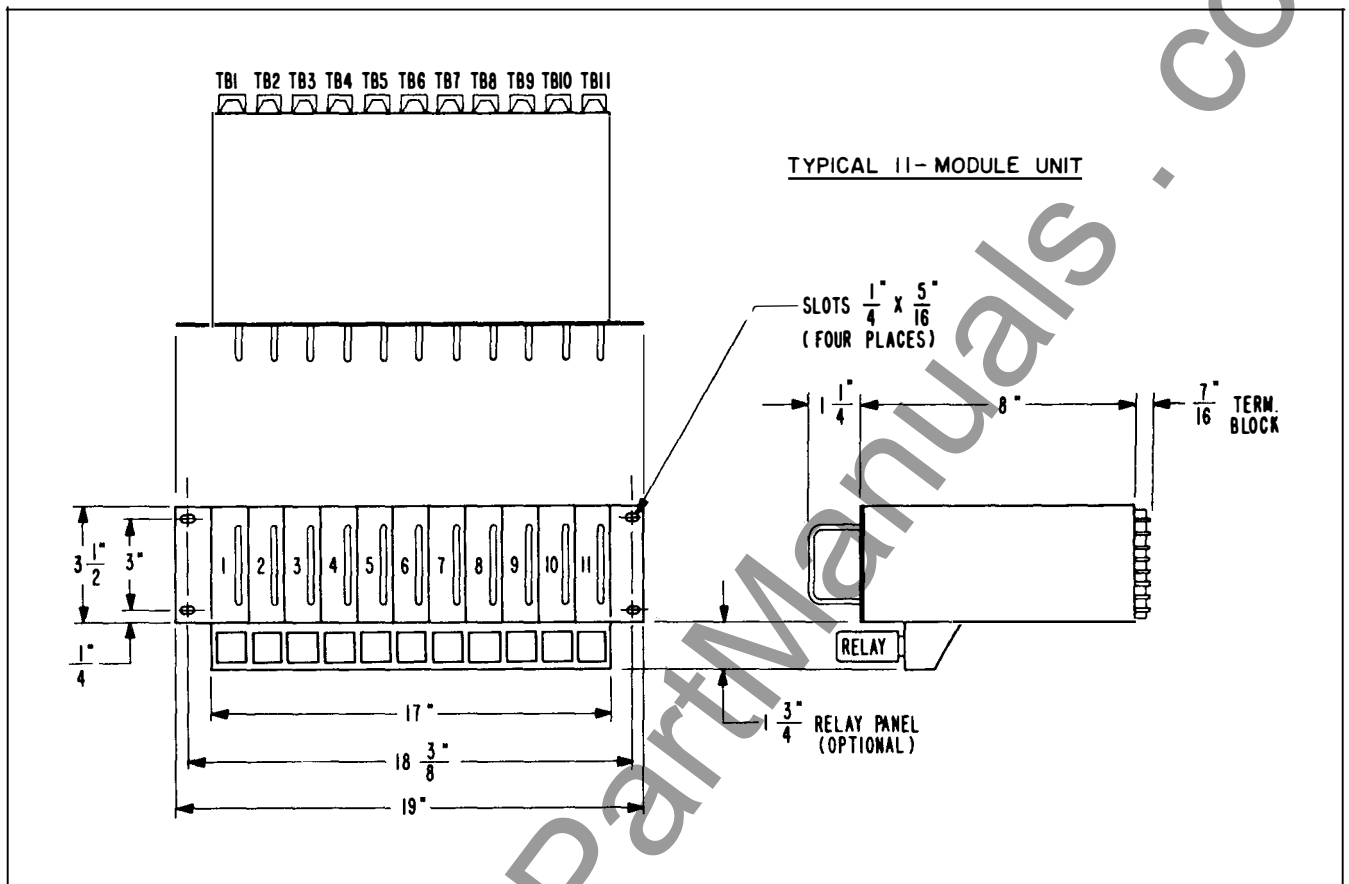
Outline and Drilling Plan of 11 Module Chassis
